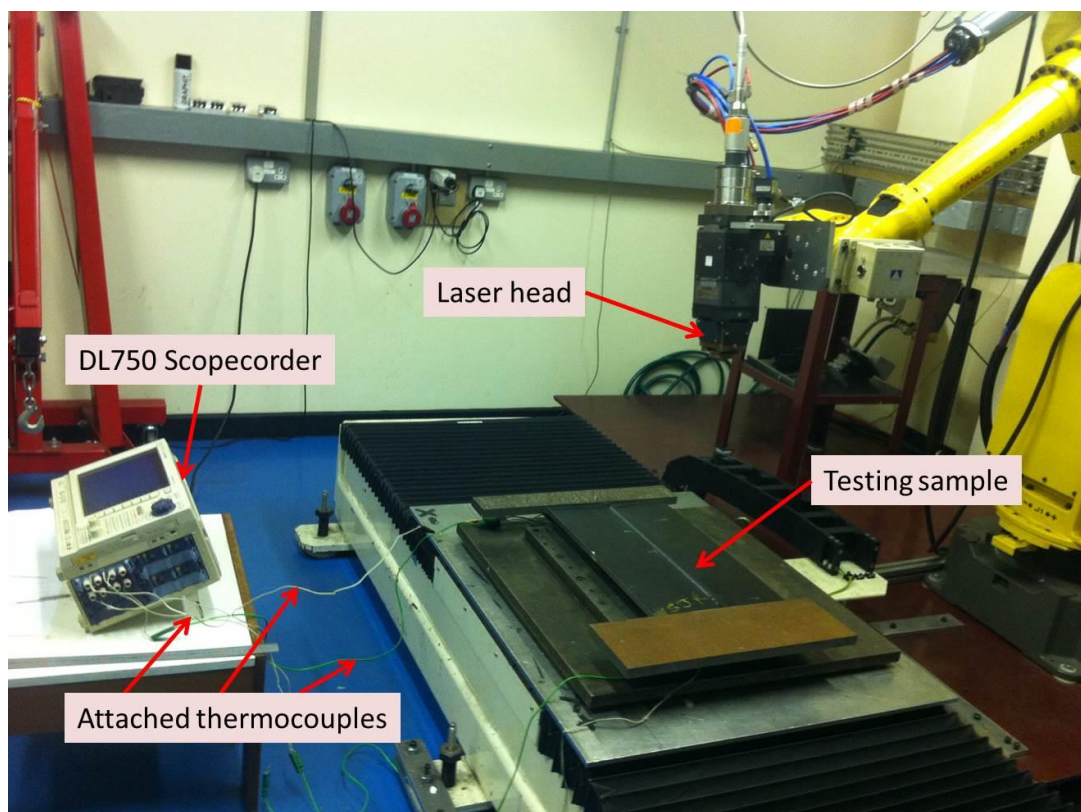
Photograph showing the laser head, scopecorder and thermocouple positions in weld metal
